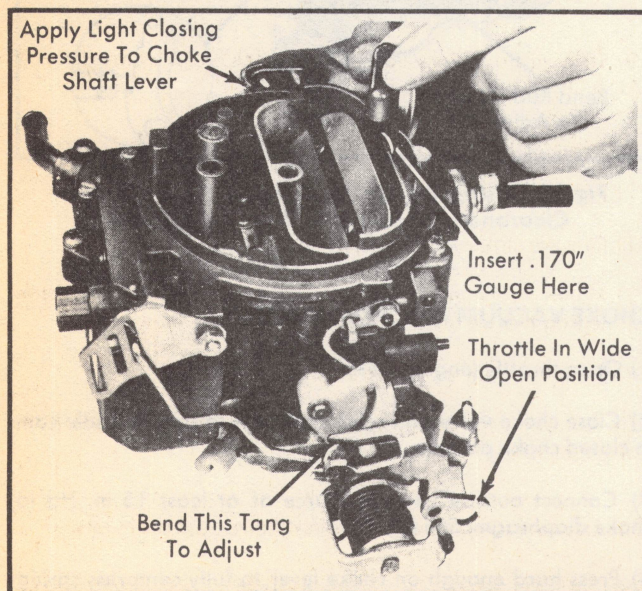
Measuring Choke Valve For Carburetor Choke Unloader Adjustment
